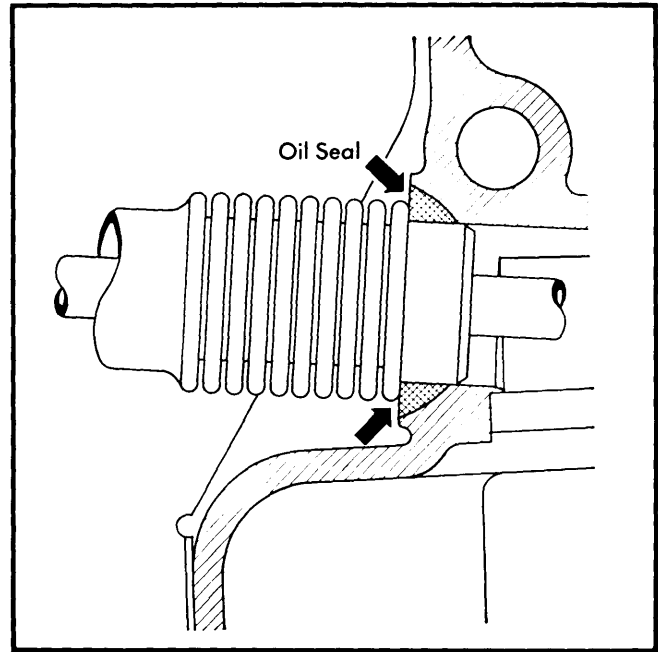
Push Rod Tube Installation with Detail of Seal Fit
